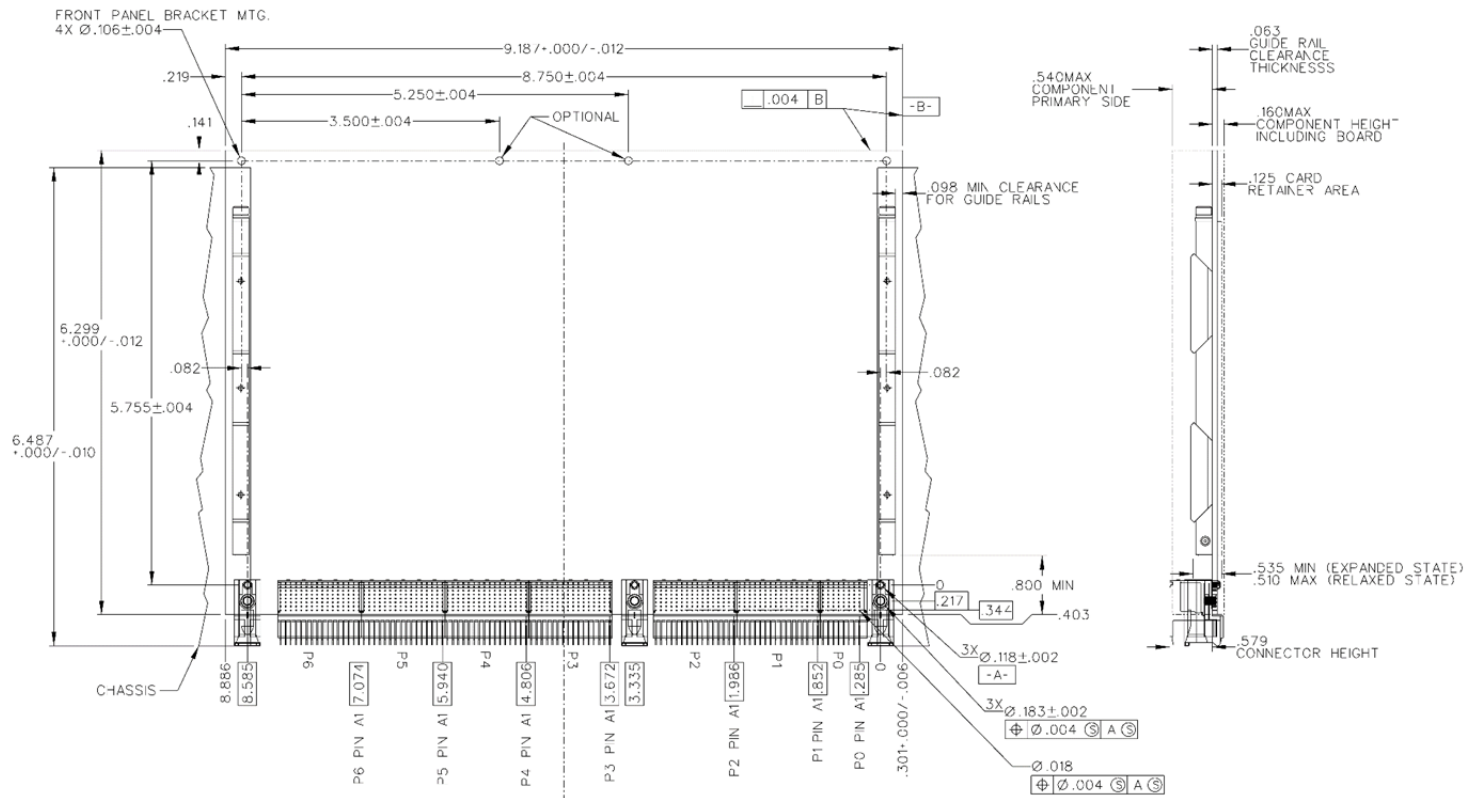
6U Module Layout with Connectors and Locating Pin Sockets
